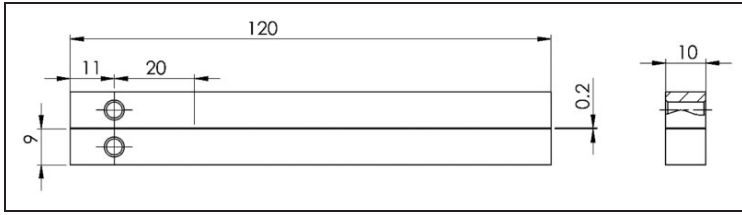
Geometry of the small DCB specimen (dimensions in mm).
